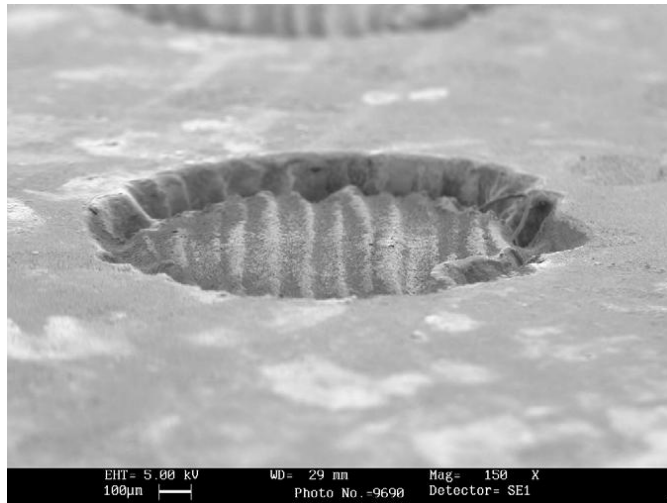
SEM image of a CO₂ laser machined 1.25mm diameter circle in an AlN surface.
